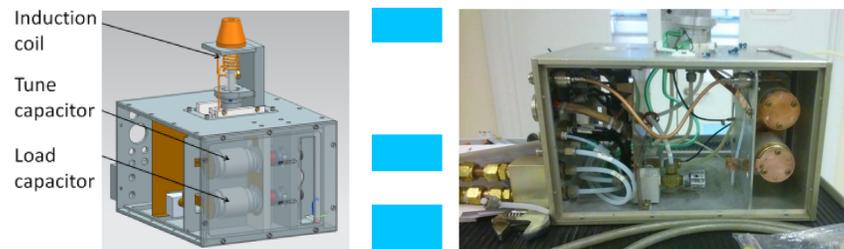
Original Helios1200's torch assembly (left), Helios1200's torch component (right)
